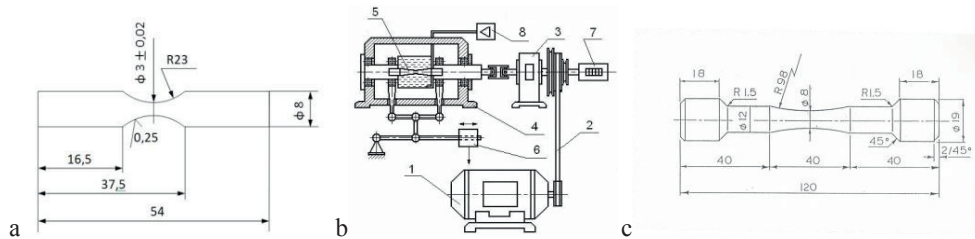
Specimen geometry and fatigue equipment: (a) steel A specimen; (b) fatigue machine FATROBEM 2004; (c) Steel B specimen; FATROBEM 2004 - electric engine 1, driving belt 2, ball-bearing unit 3, testing box 4, specimen 5, device for loading 6, counter 7, device for circulation and aeration of corrosion agent 8.
